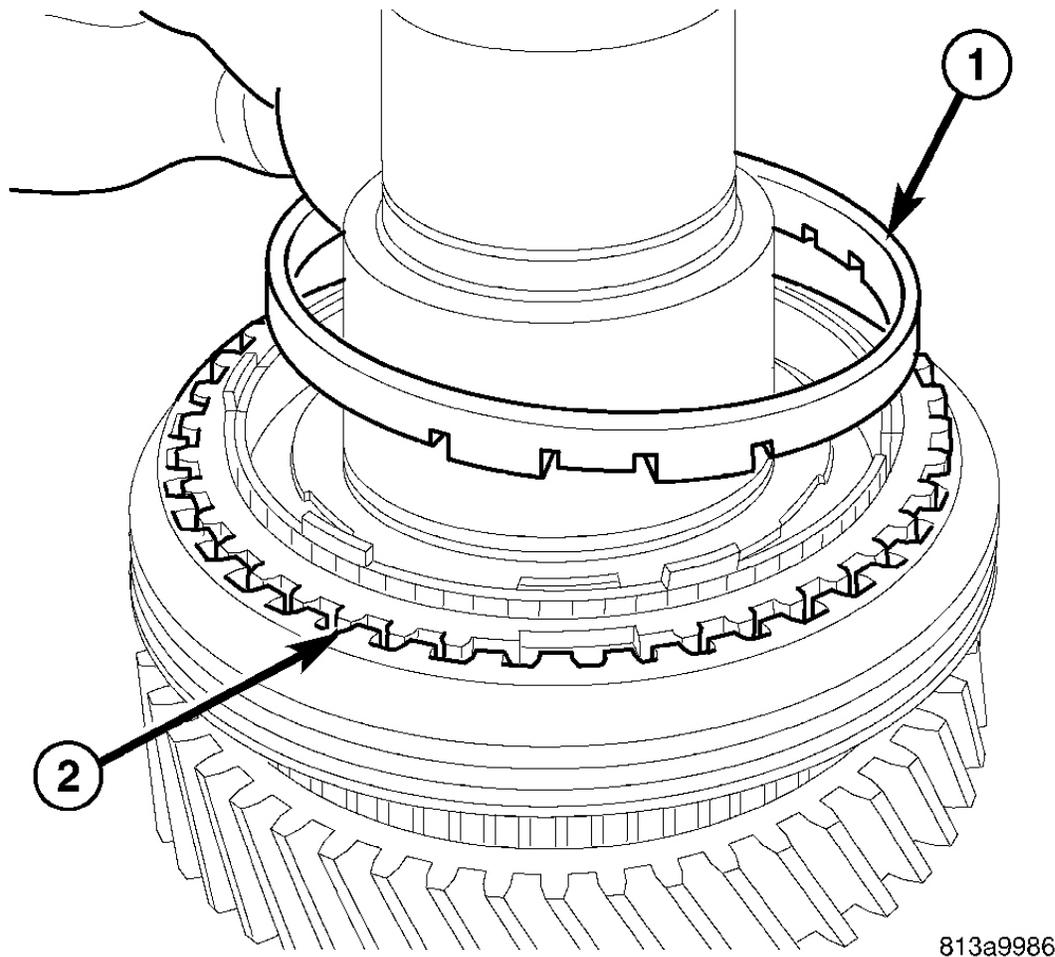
Installing First Gear Outer Friction Ring Into Synchronizer Hub
